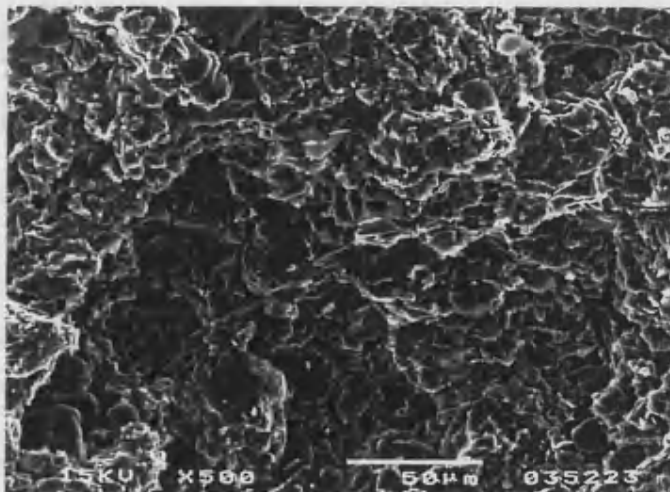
EY306 fracture morphology for 3 point bend.
